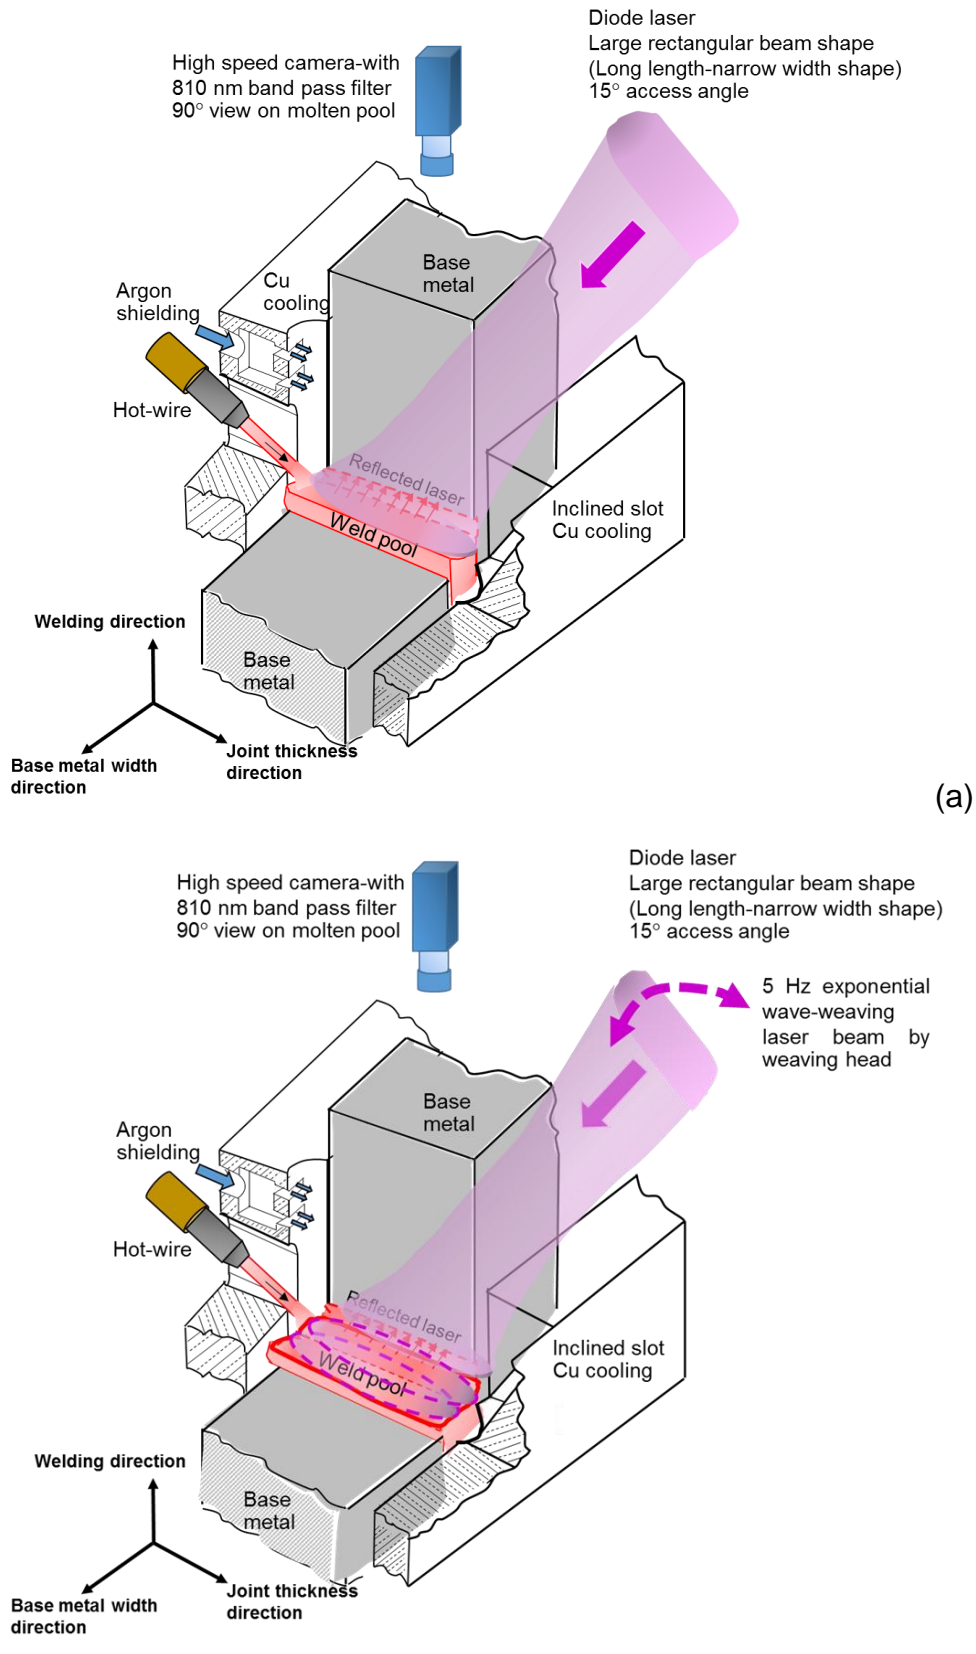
Schematic illustration of the vertical welding process using hot-wire laser (oblique laser access) on gap width of 10 mm (a) stationary laser irradiating method and (b) weaving laser irradiating method
